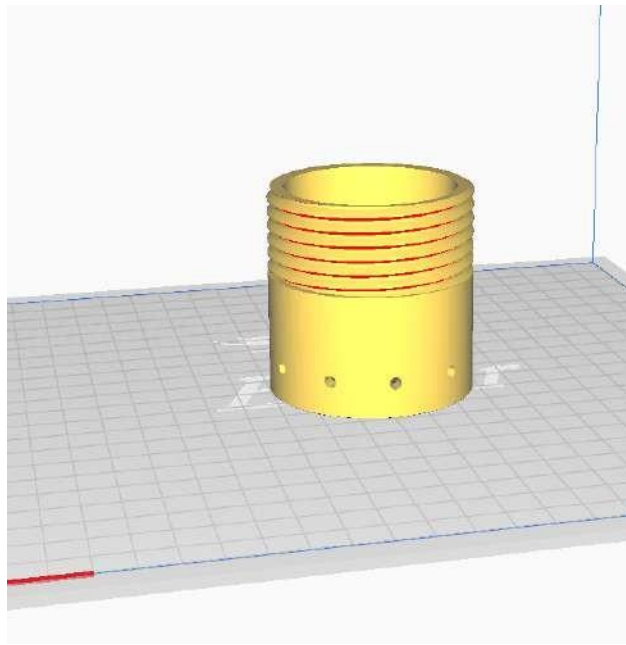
Tube-screw adapter to the feeder in cura Ultimaker. Source: own
